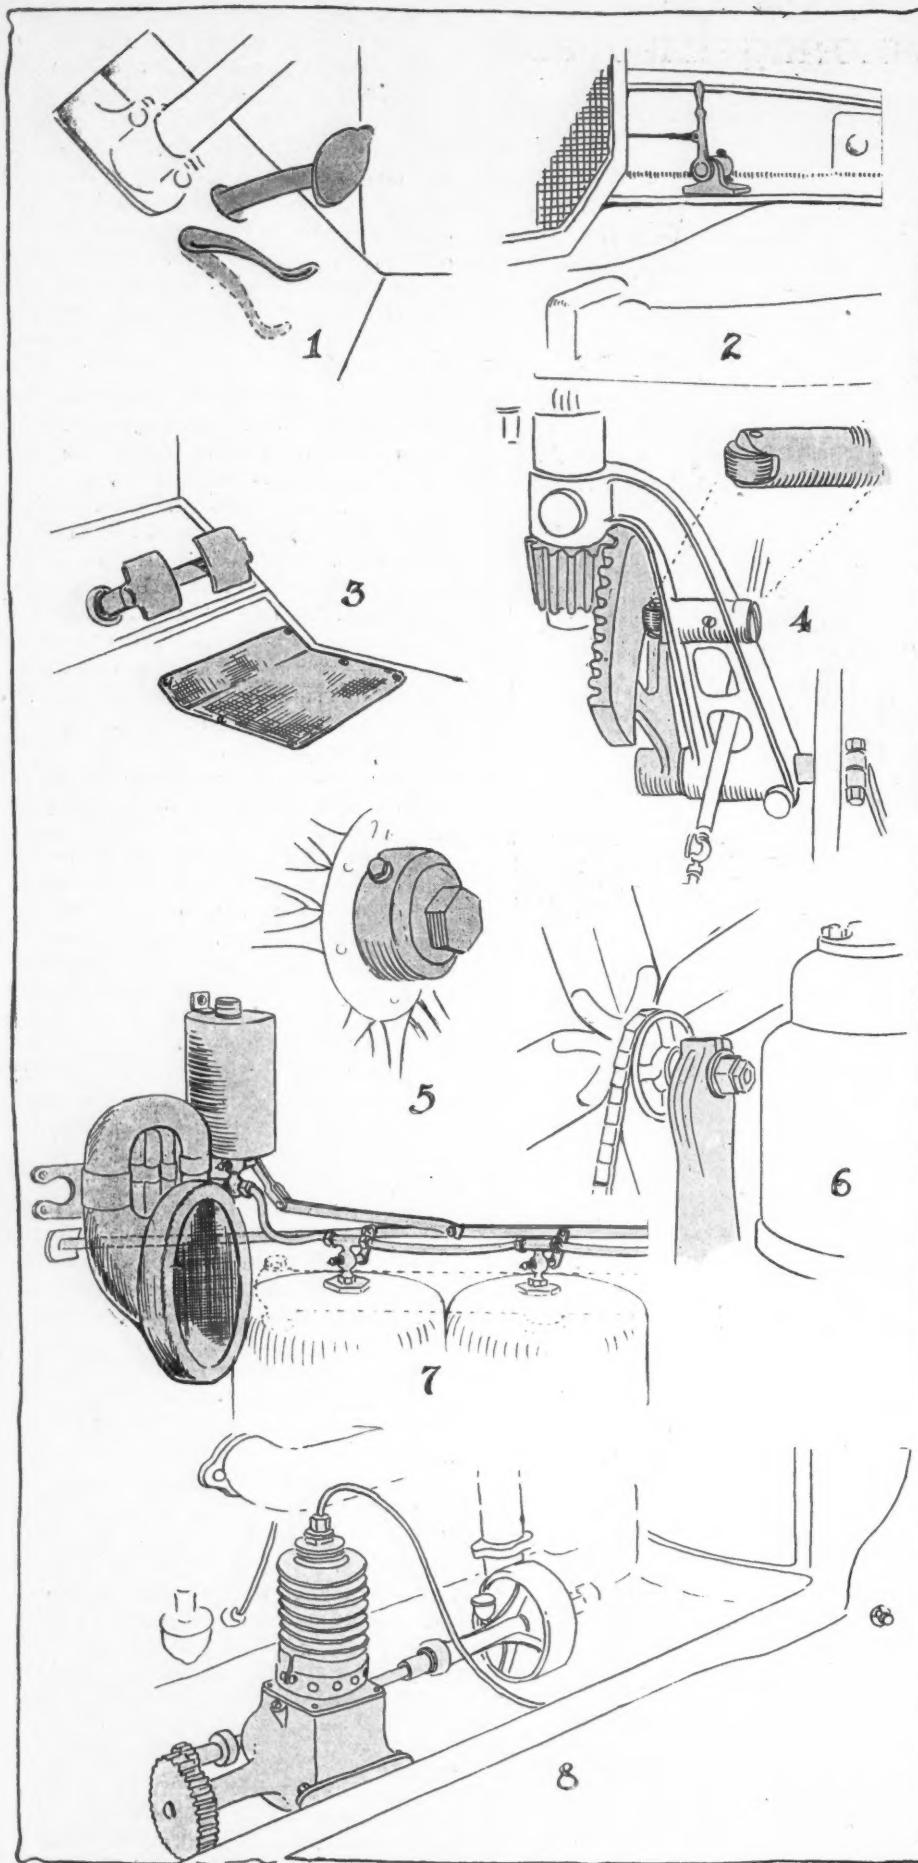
1, PREMIER FOOT ACCELERATOR; 2, CARBURETOR CHOKER ON SPEEDWELL; 3, HEEL-PLATE ON COMBINATION; 4, THRUST ROLLER REO STEERING GEAR; 5, TO LOCK NATIONAL WHEEL HUB CAPS; 6, CADILLAC ADJUSTABLE FAN SUPPORT; 7, ELMORE'S HORN AND CYLINDER PRIMING-TANK ON DASH; 8, PIERCE-ARROW TIRE PUMP
